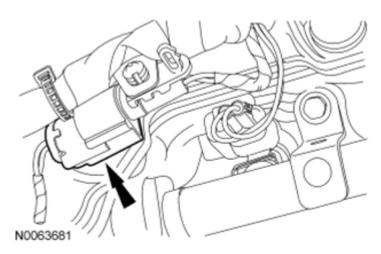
Locating CHT Sensor Electrical Connector Courtesy of FORD MOTOR CO.
